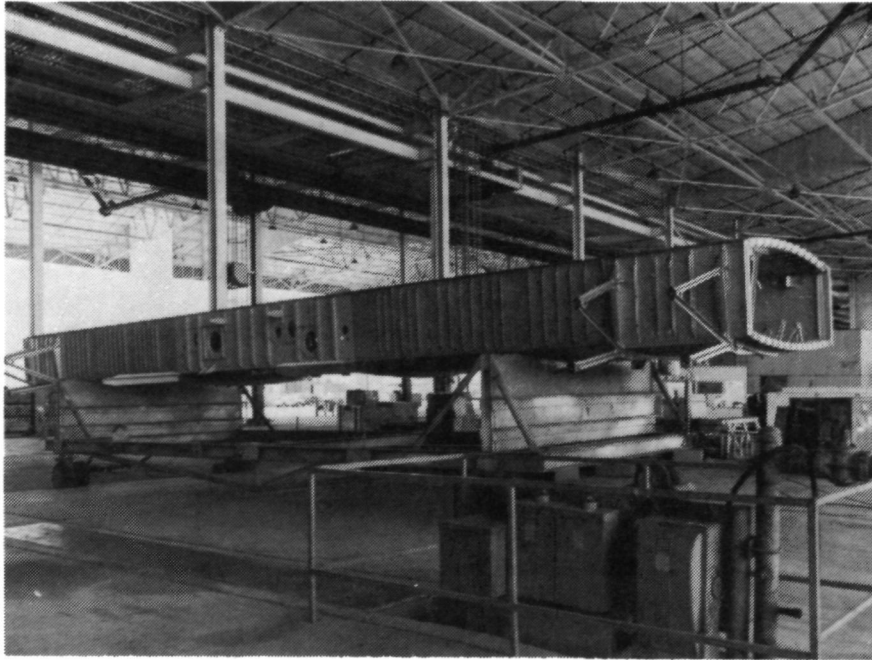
SPARE CENTER WING BOX FOR C-130
